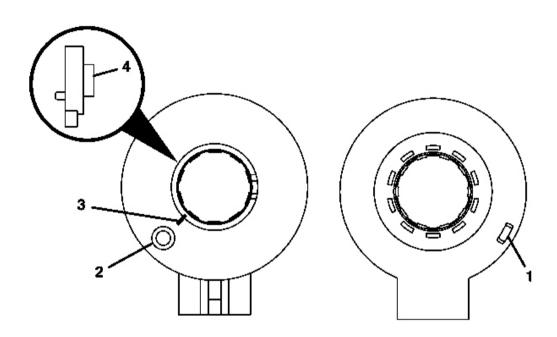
Pin Hole, Rotor Flange Cuff And Alignment Mark Courtesy of GENERAL MOTORS CORP.
